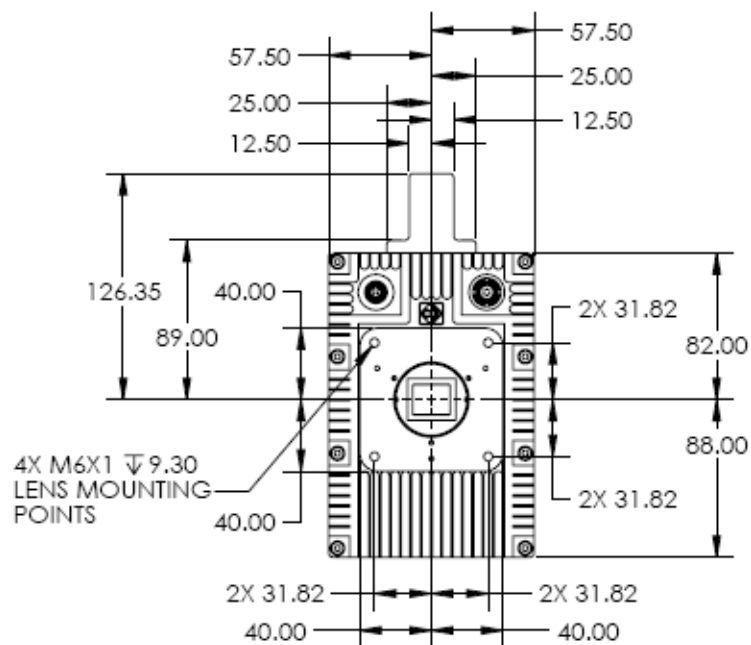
HG-XR/XL dimensions, front (in mm)
